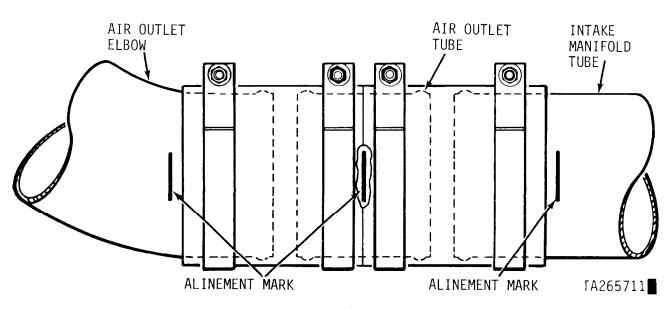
Alinement of Intake manifold tubes and hoses.
